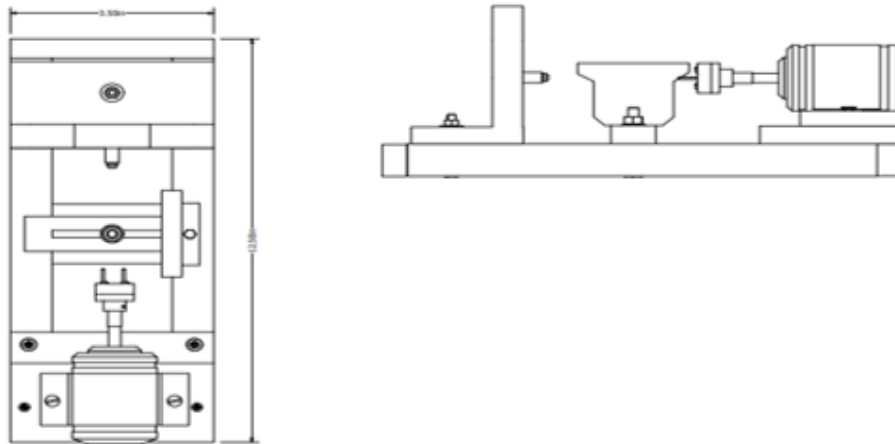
Orthogonal view of mini laboratory wood lathe machine
